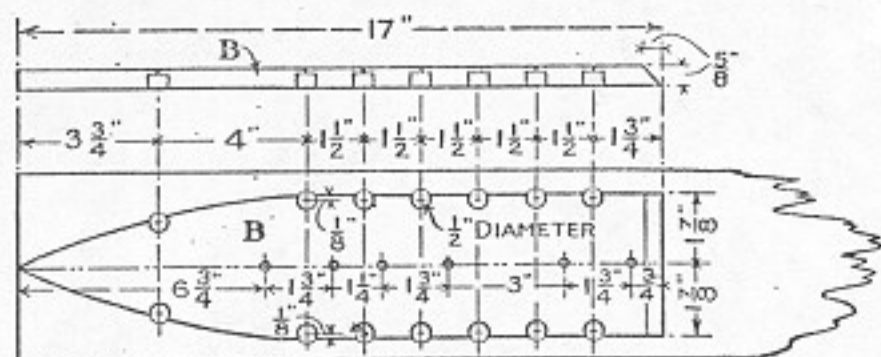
Plan and Side Elevation of Superstructure-Deck
